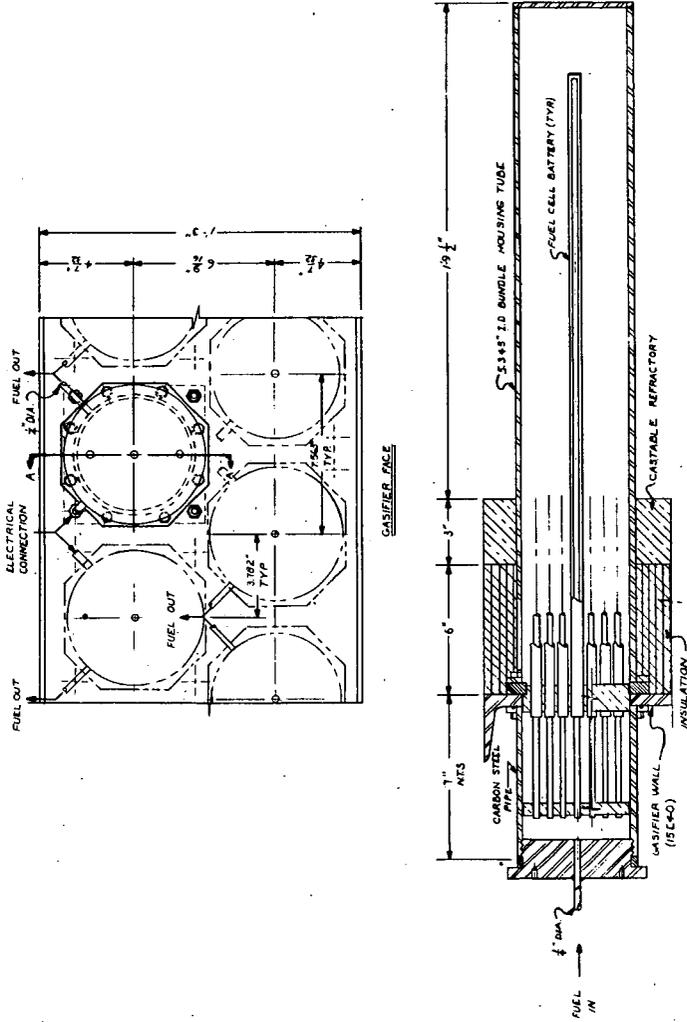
FUEL CELL BUNDLE ASSEMBLY
